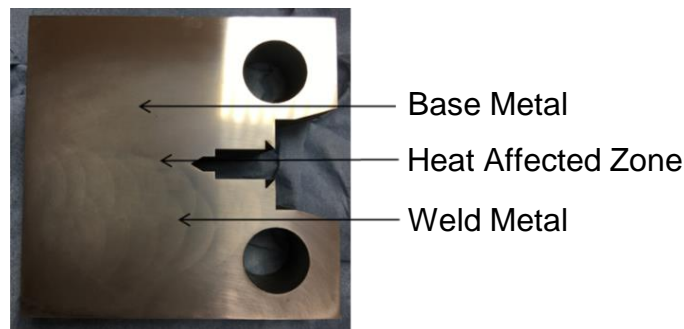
C(T) sample extracted from the welded plate after polishing and etching
